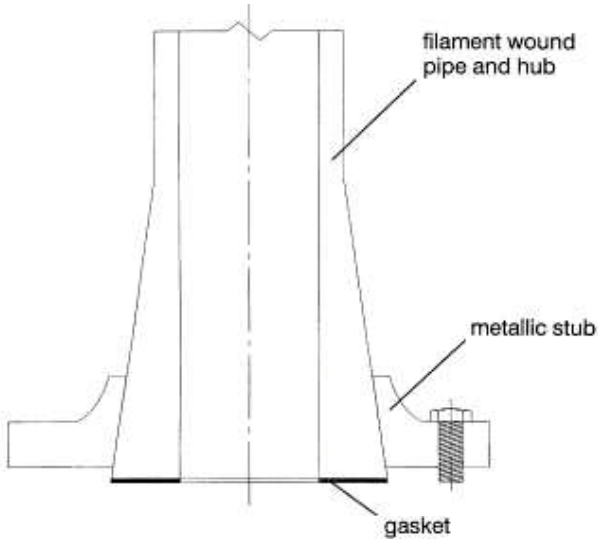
Schematic of the modified stub flange joint (Adapted from [2])
